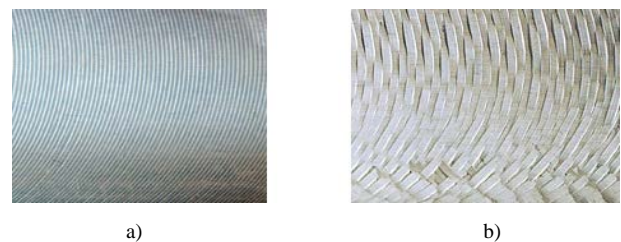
Examples of surface micro features: a) texture formed by stable milling of a plane; b) chatter marks left by unstable milling.
